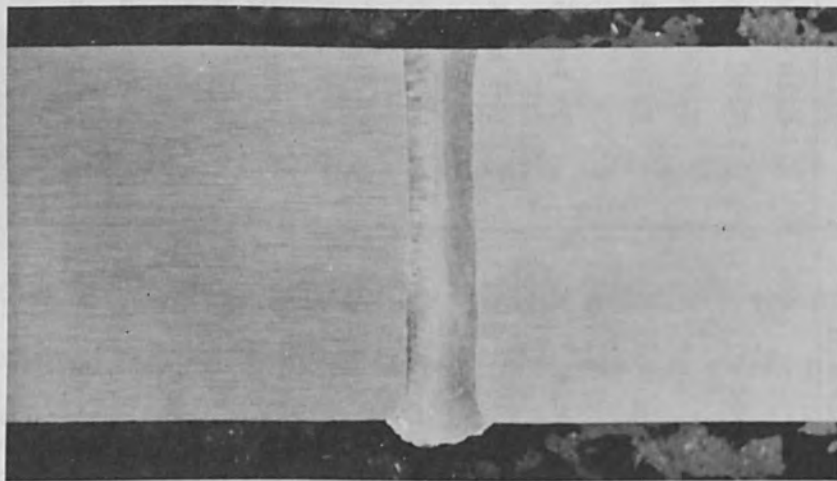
Typical Fusion Zone Geometry, 3/8-Inch Aluminum Alloy 6061-T6 Weld, Depth-to-Width Ratio = 6 to 1, Crown Machined Flush (Mag: 5X, Etchant: Keller's)
